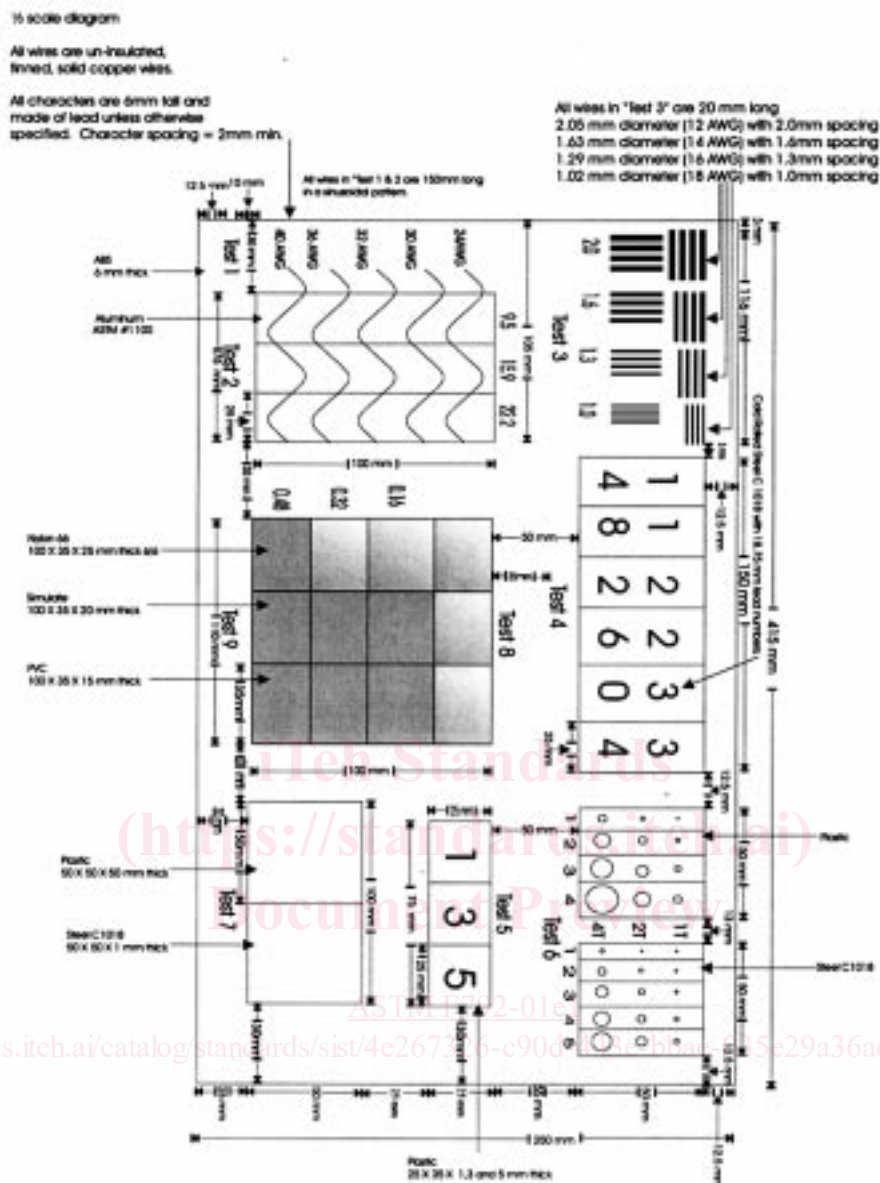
ASTM X-Ray Test Object Assembly Plan
